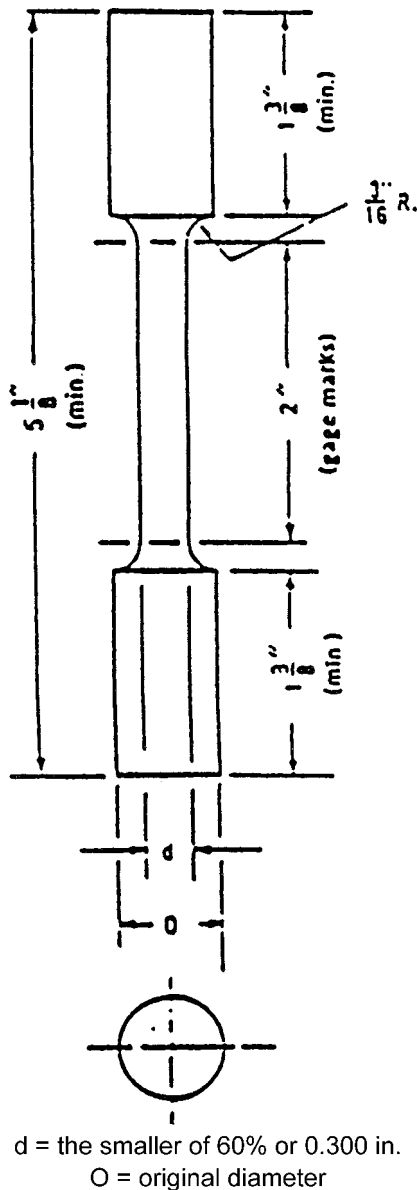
Turned Dumbbell Specimen for Tensile Testing
